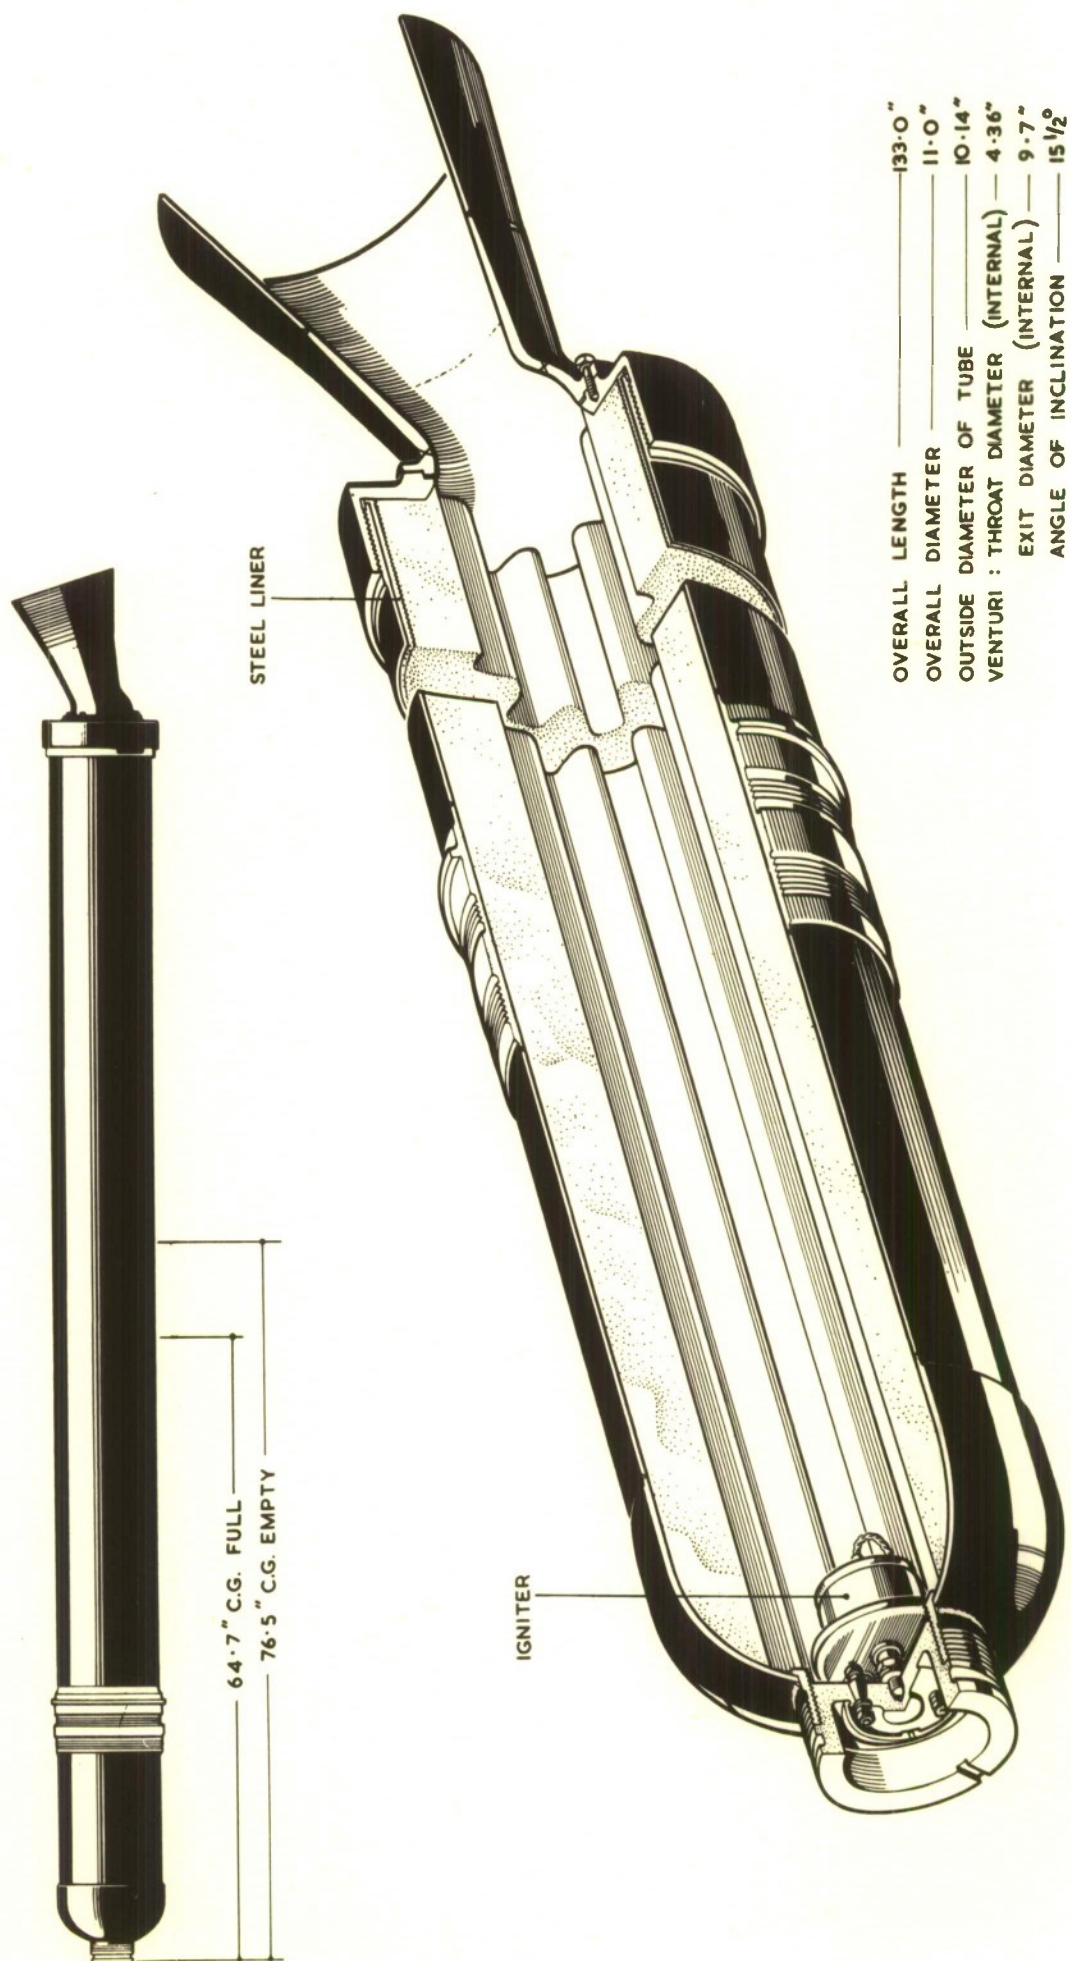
ASSEMBLY OF GOSLING II MOTOR
